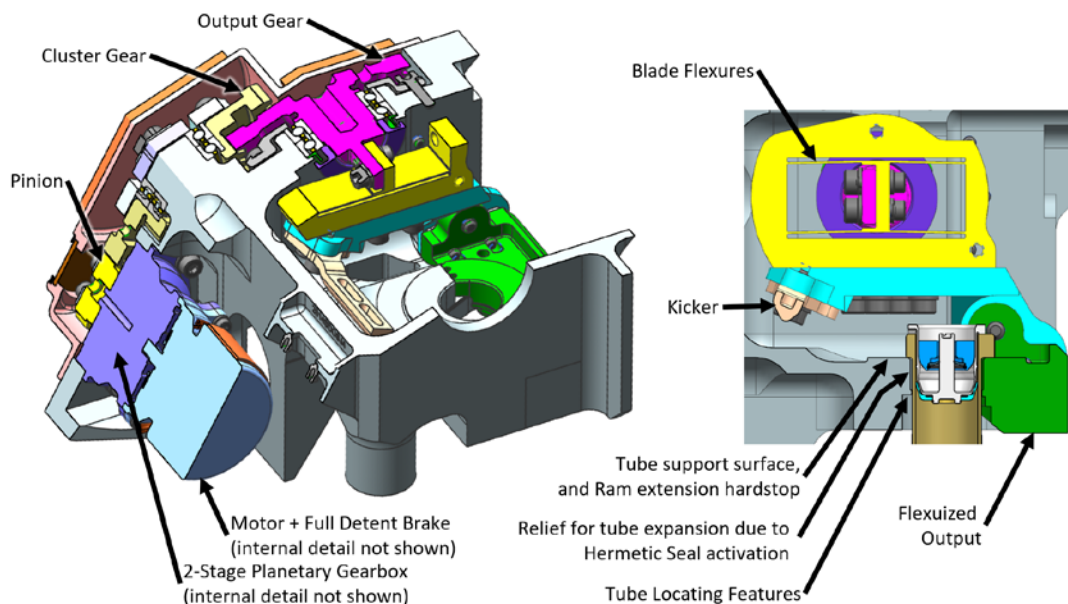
View of Gripper Mechanism showing details of the gear transmission and flexurized output.
